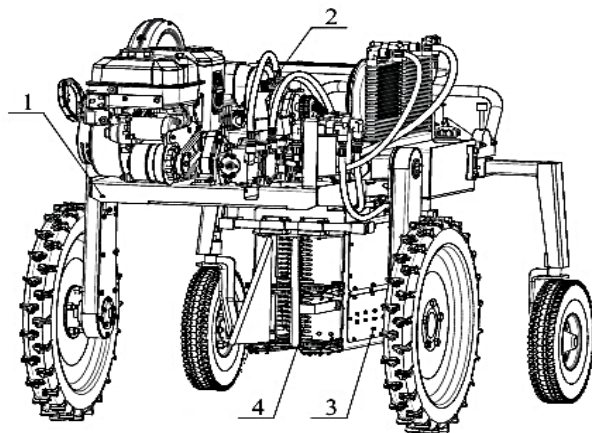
Machine for Harvesting Dried Safflower Petals [adapted after 23]
